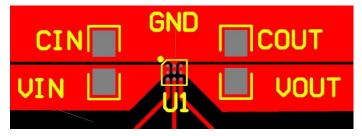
Recommended PCB Layout for WLCSP-9 Package
